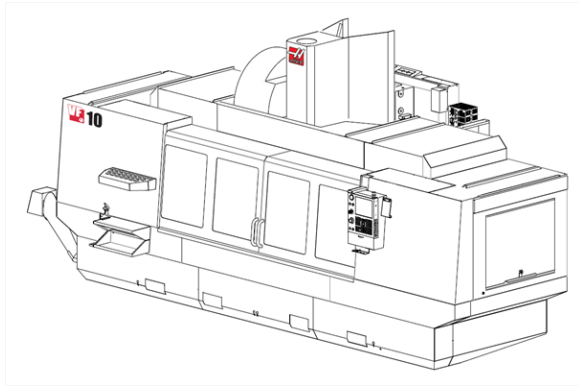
The 3-axis milling center MLD-VF-10/40 [26]
